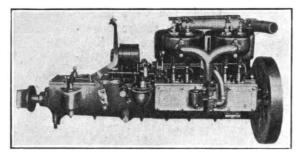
INTAKE SIDE OF MAXWELL ENGINE
